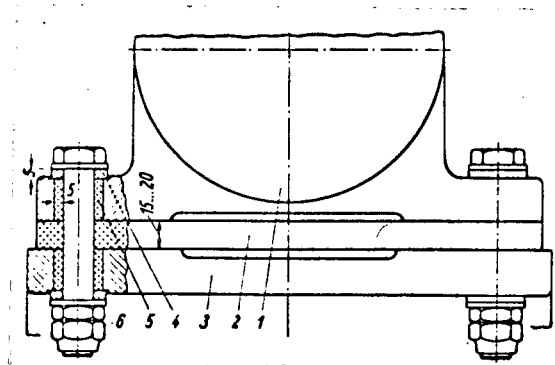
Vibration insulation for a cutter shaft bearing. 1. Bearing housing. 2. Rubber plate. 3. Machine stand. 4. Rubber disk. 5. Rubber casing. 6. Elastic stop nut.
